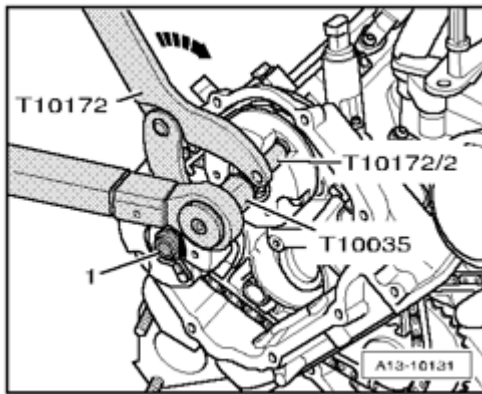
Setting Counter-Holder T10172 With Pin T10172/2 In Place On Camshaft Adjuster Of Left Intake Camshaft
